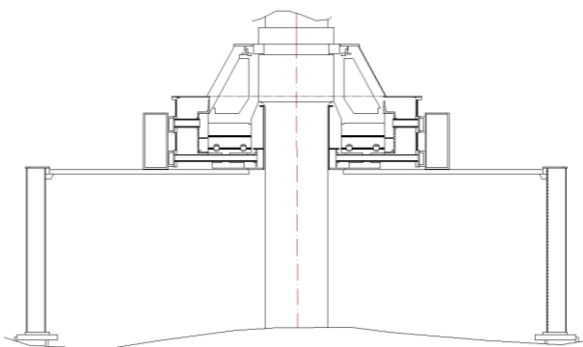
Cross-section of axial bearing assembly of aggregates on HPP Grabovica
